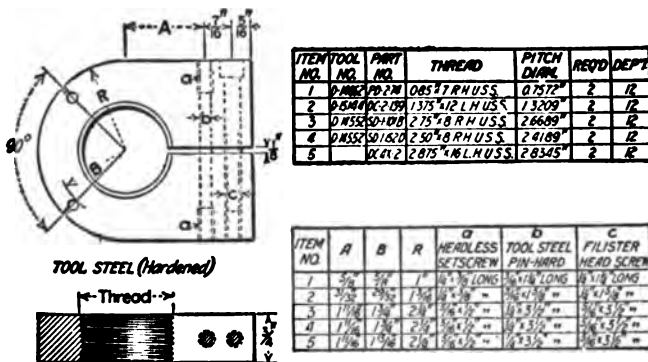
ADJUSTABLE FEMALE THREAD GAGE
